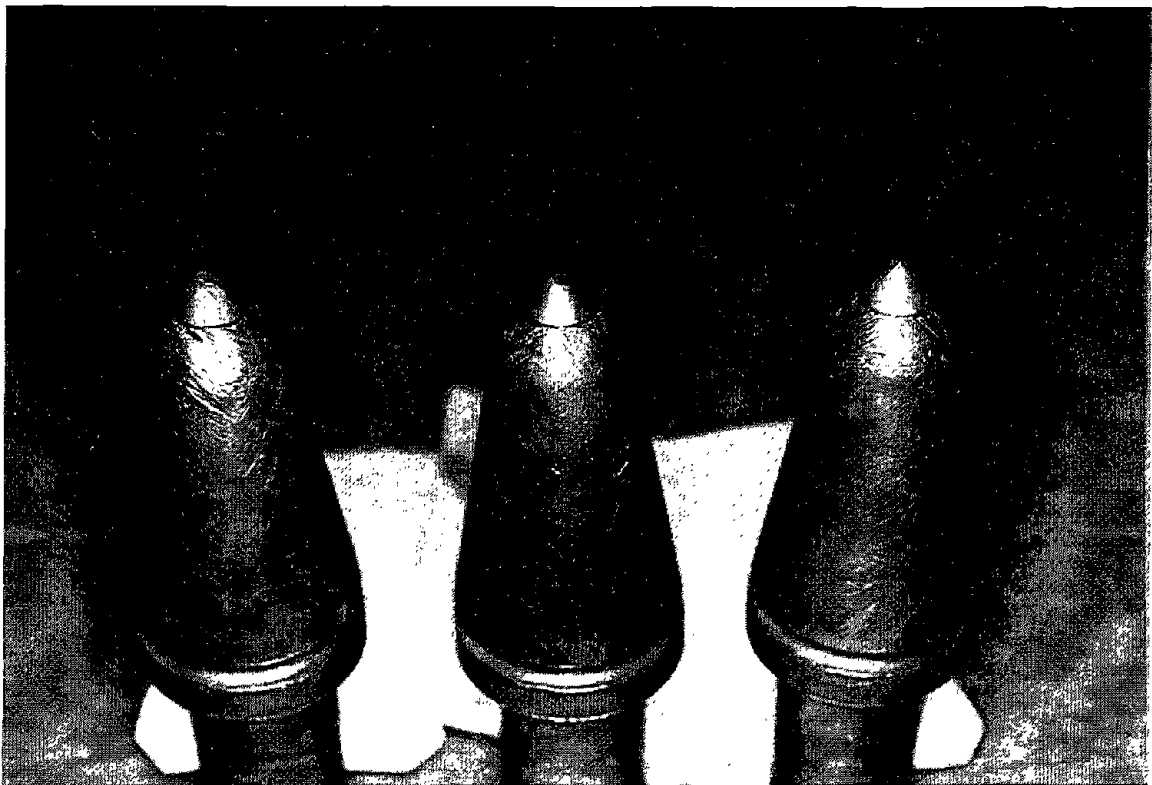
Sample bits from headgate drum after water-jet-assist cutting, 34 rpm: E: endring; C: center of drum; G: gobside
